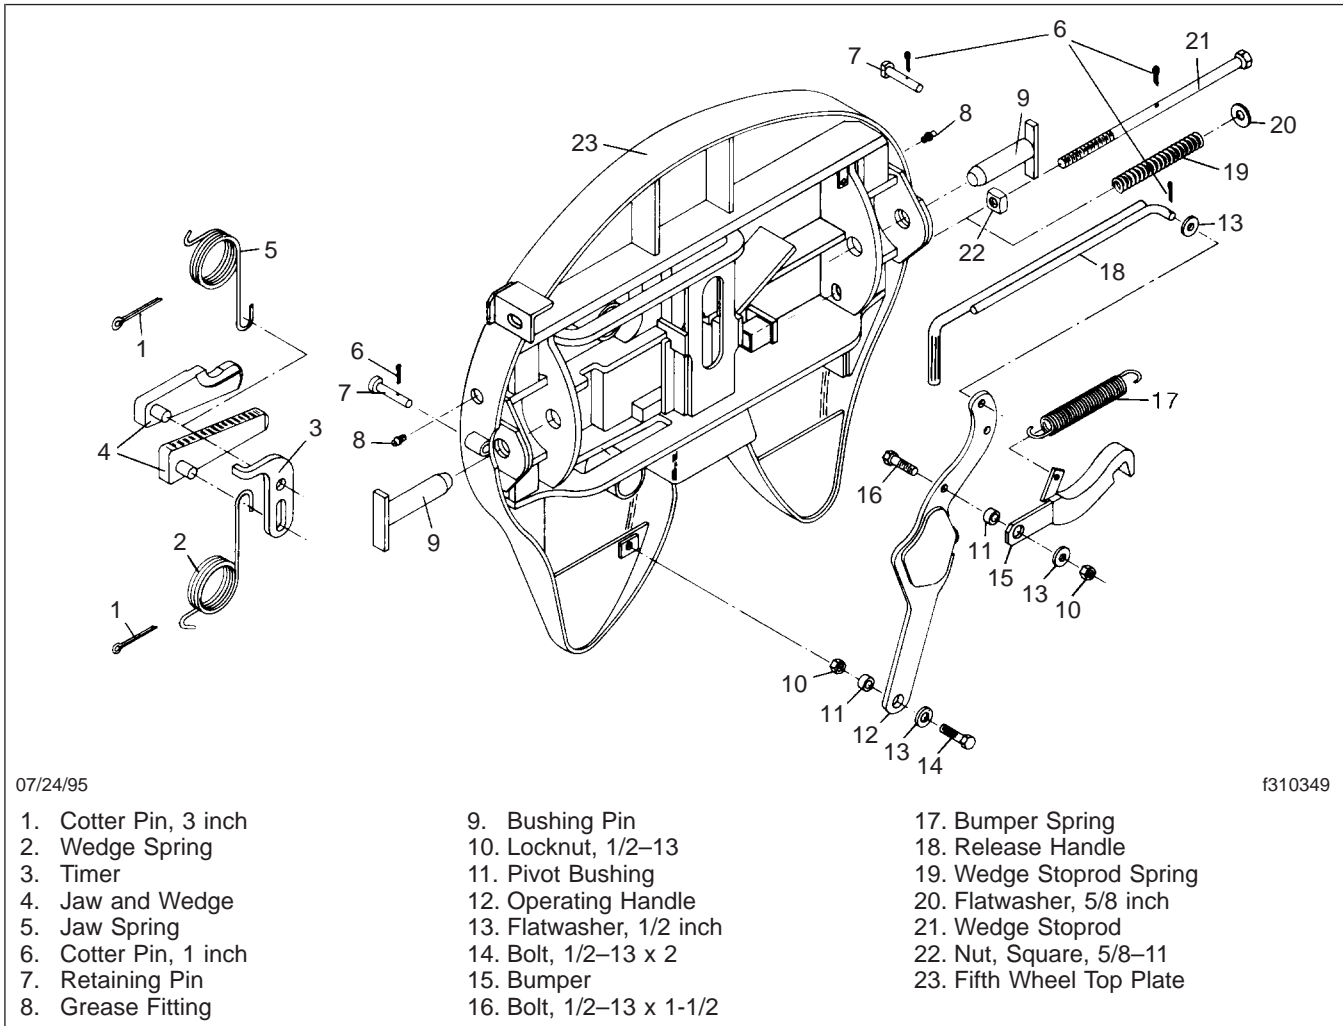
, Fontaine 5000/6000 Series Fifth Wheel (right-side release shown)
